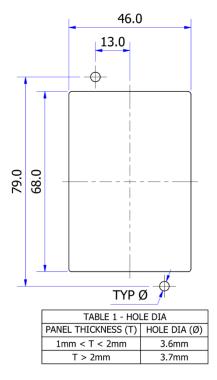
Panel cut out for flush mounting Terminal Block Type TBD-R1 base
